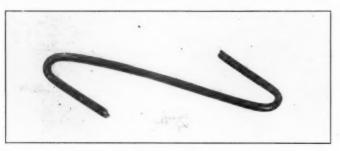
A Sister Hook Made From Old Steel Contact Wire
